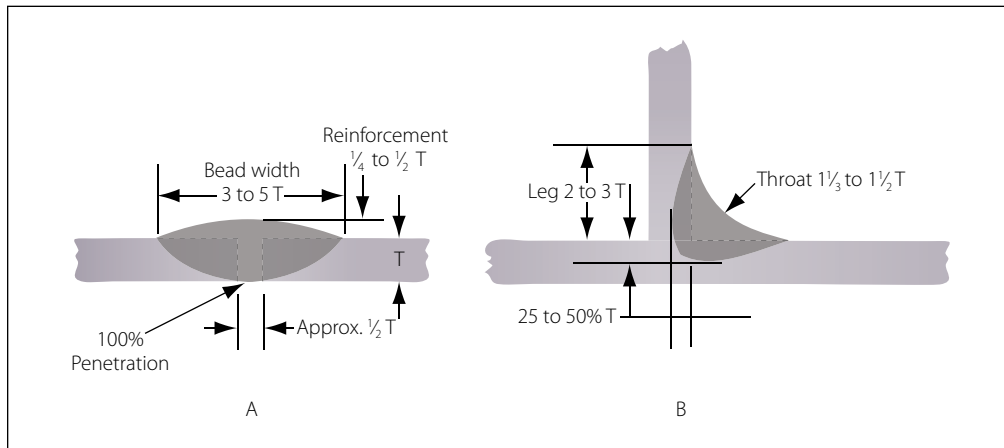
(A) Butt weld and (B) fillet weld, showing width and depth of bead.
